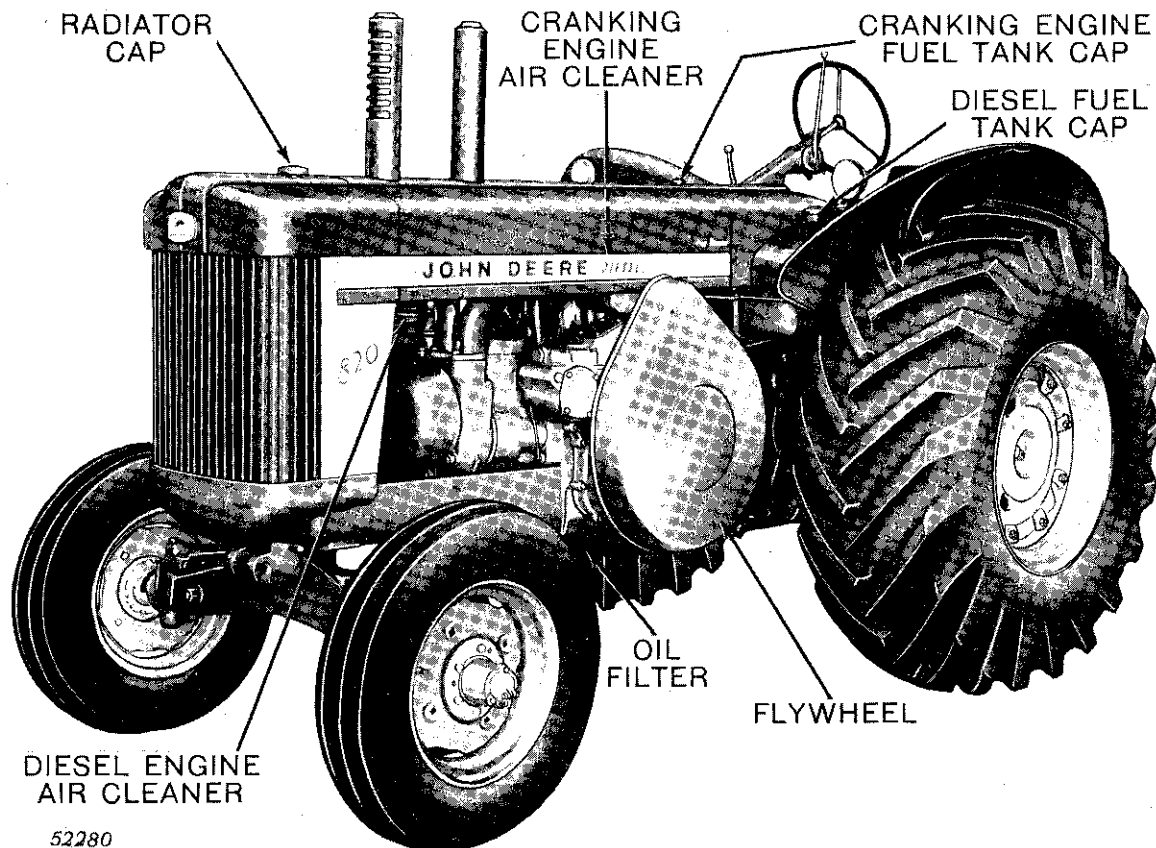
John Deere "820" Series Diesel Tractor—Flywheel Side
